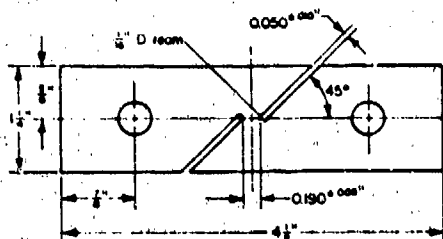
SHEET SHEAR TEST SPECIMEN
